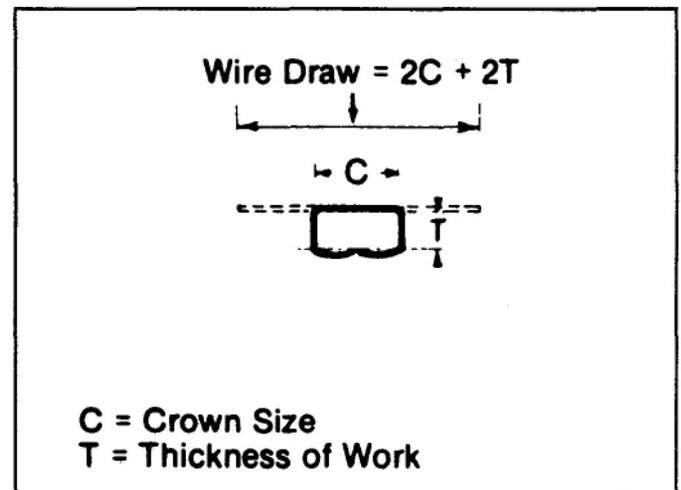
Wire Draw Dimensions and Formula for $.175$ thru $1/2''$ (12.7mm) Crowns
